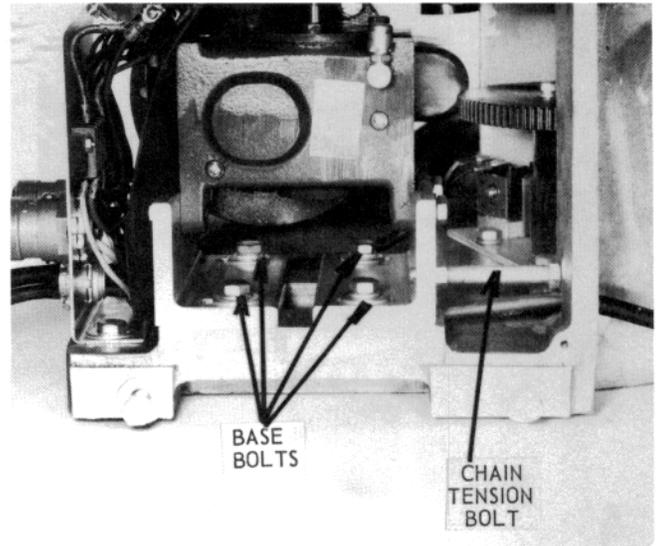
Chain, Chain Tension Bolt, and Motor Mounting Base Bolts
